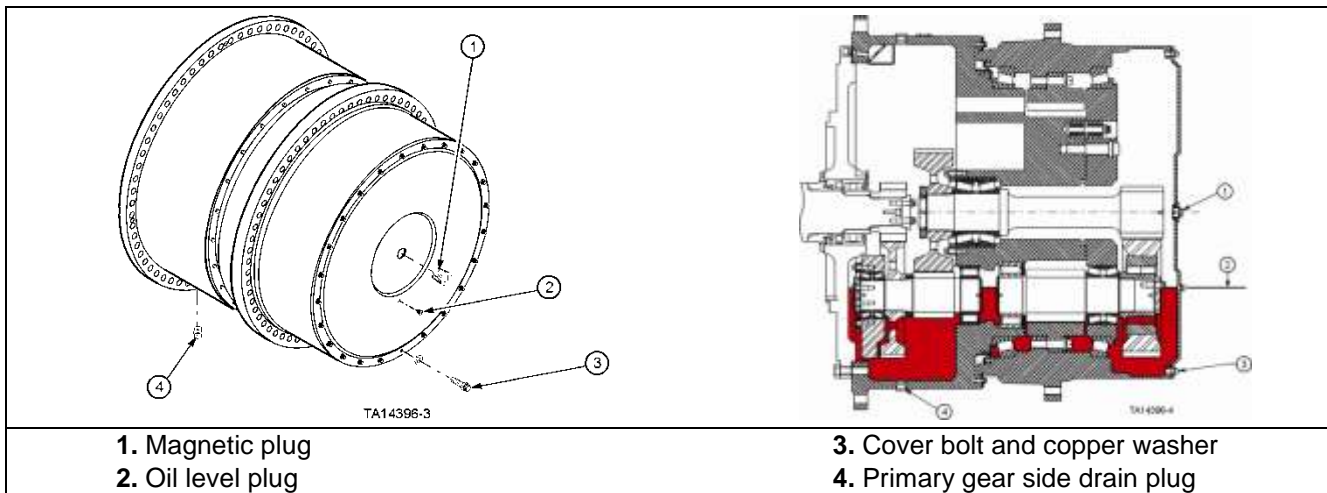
Oil servicing points and oil level - 51A2 planetary drive current production machines
